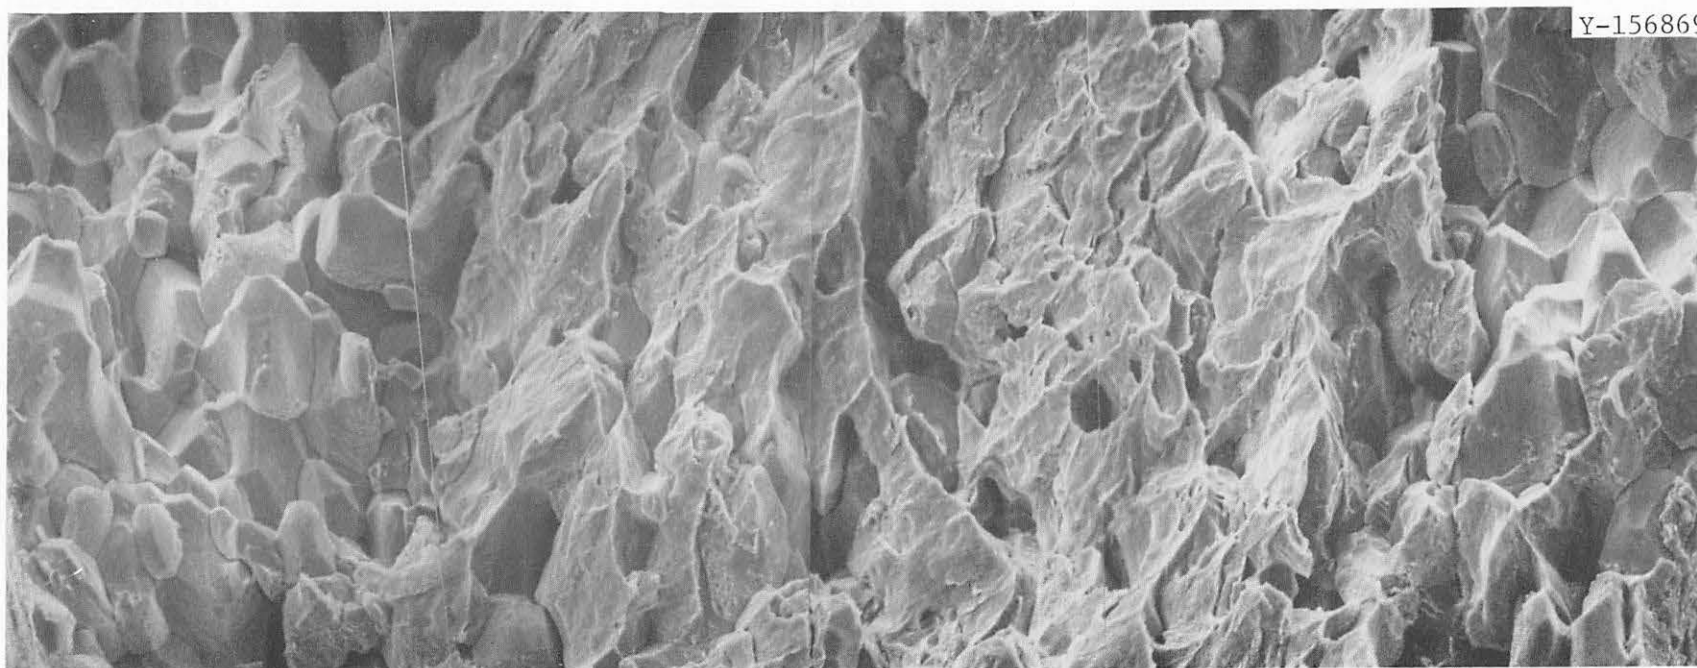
Fracture Surface Across the Molybdenum Specimen Exposed to Oxygen for 600 h at 1150°C and Fractured at 1150°C; 24% Elongation. 500×.
